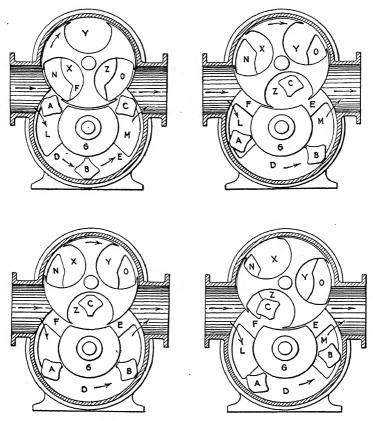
Sturtevant impeller blower fixed central core and end-plate of lower cylinder.
